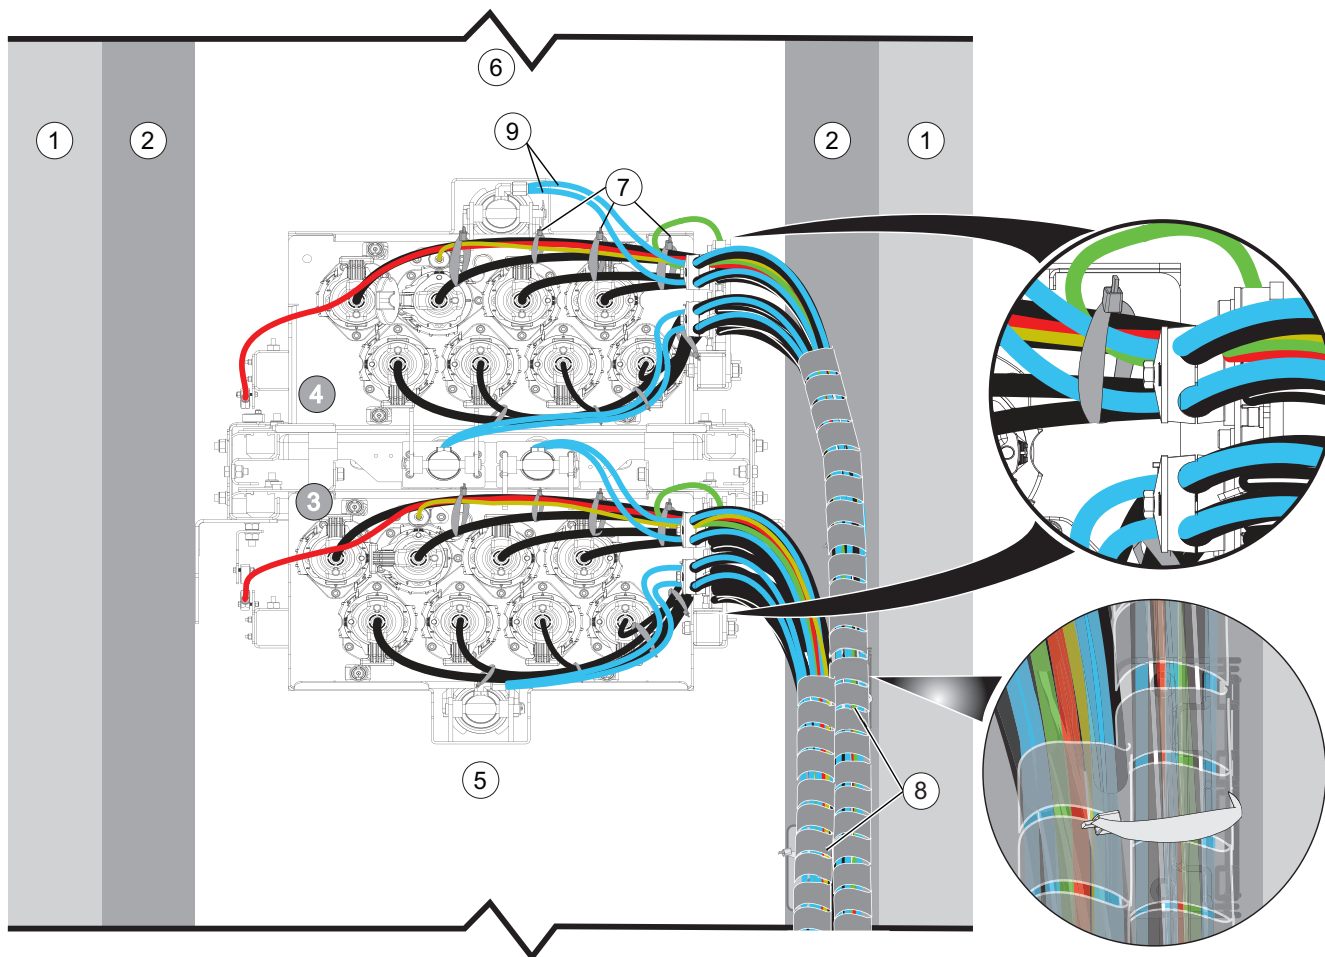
Cable Routing through Deep Channel Bracket Assemblies - Spiral Wrap
